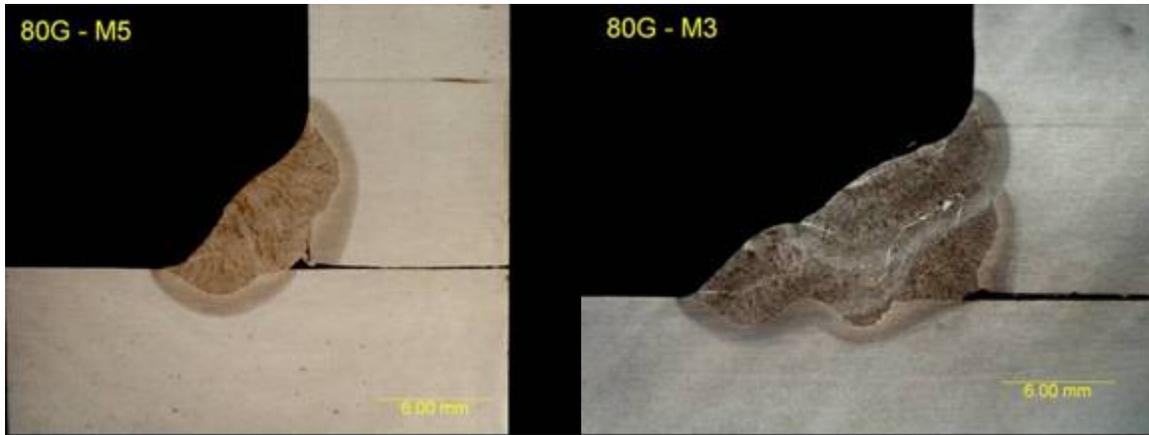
Macros of GMAW Welds on X80 Pipeline Material
